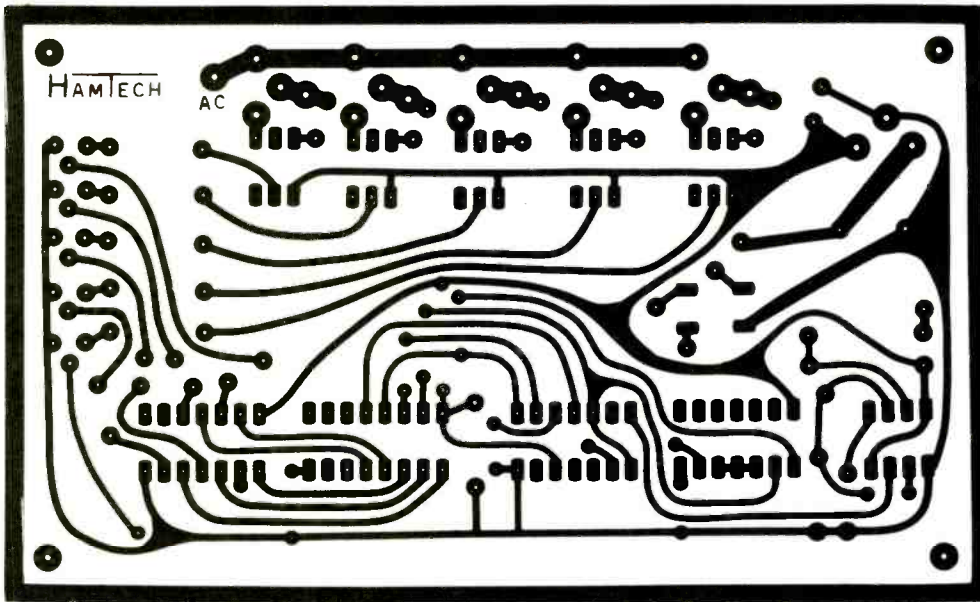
SAME-SIZE PRINTED-CIRCUIT BOARD layout shown foil side up illustrates how simple the circuit is. Wire-wrap technique may be used; but for goof-proof hookup, use etched circuit board.
